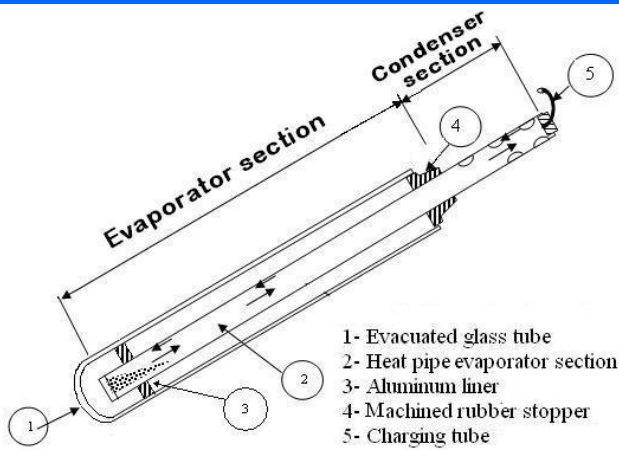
Assembly of the evacuated tube heat pipe solar collector
